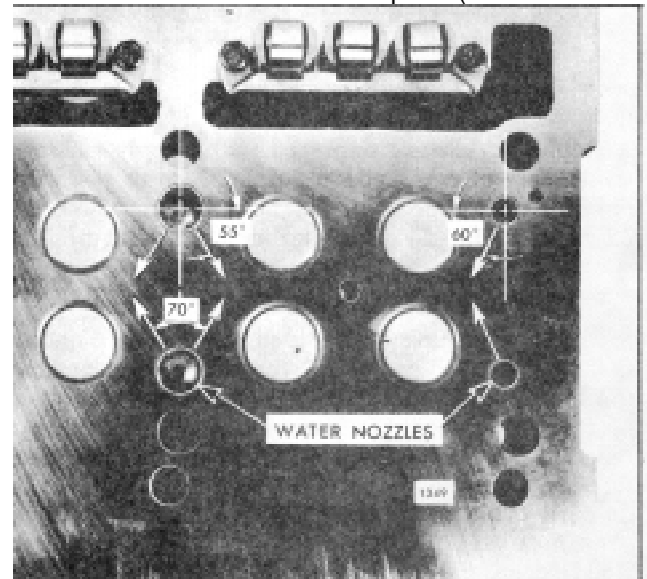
Correct Installation of Water Nozzles in Four-Valve Cylinder Head
